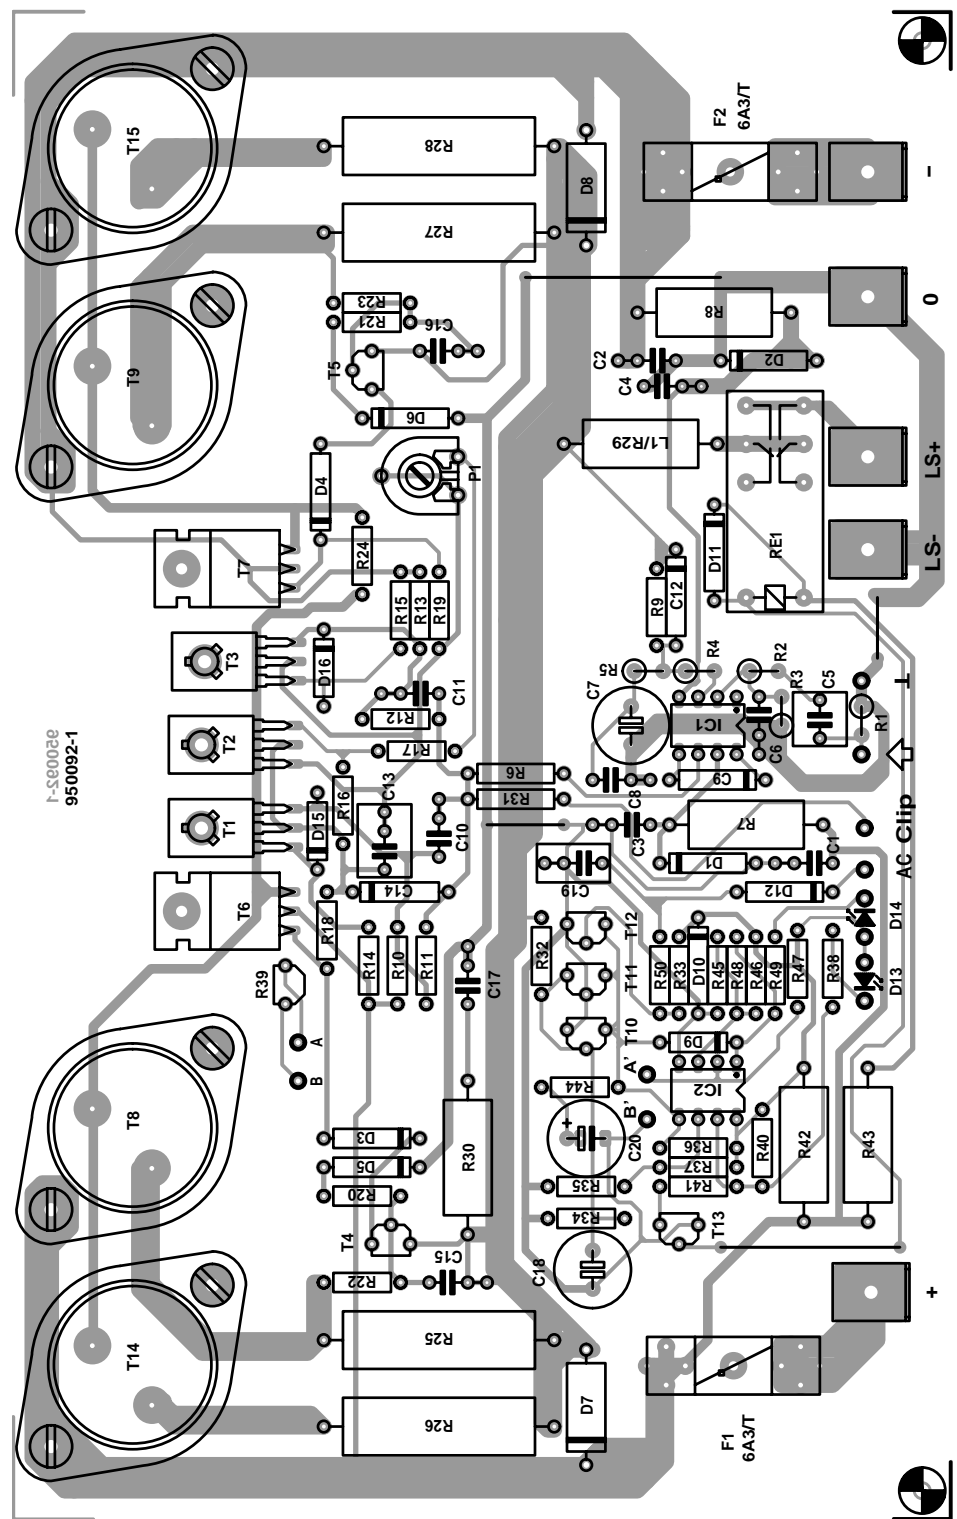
Component layout of the printed-circuit board for the 300 W power amplifier.
